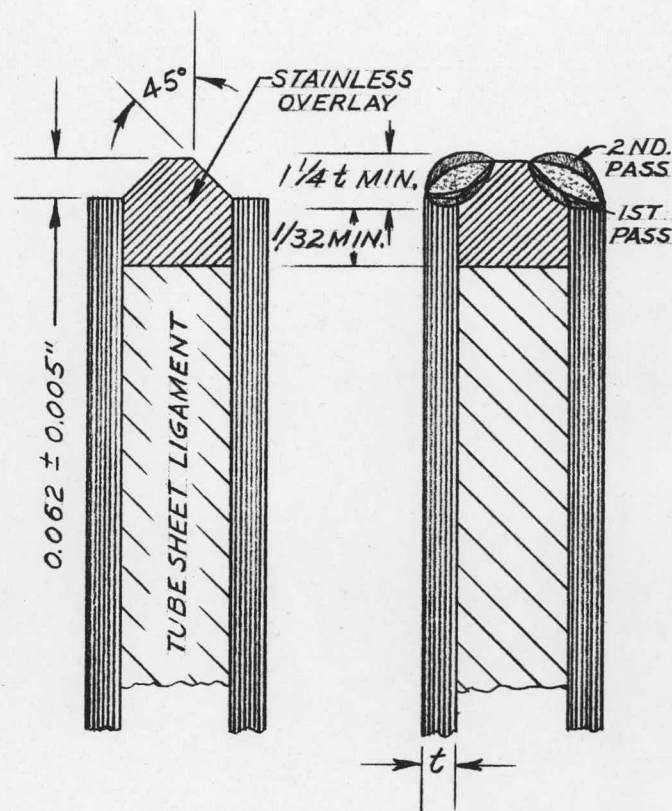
PROCEDURE FOR MANUAL TUNGSTEN-ARC WELDING OF TYPE 430M TUBES TO A350-LF1 (MOD.) TUBESHEETS
